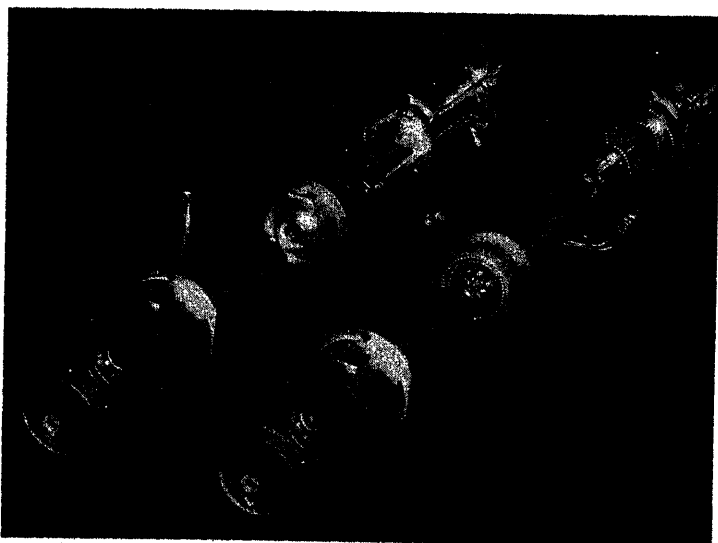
Two-stage transmitter tuning unit, exploded view of the insides
